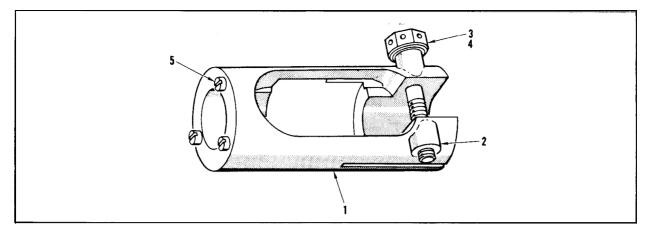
Vibration Transducer Power Turbine Adapter Part No. 171578, Location of Parts
